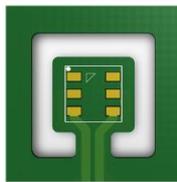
Top view of the sensor PCB with milled slits to minimize heat transfer.
